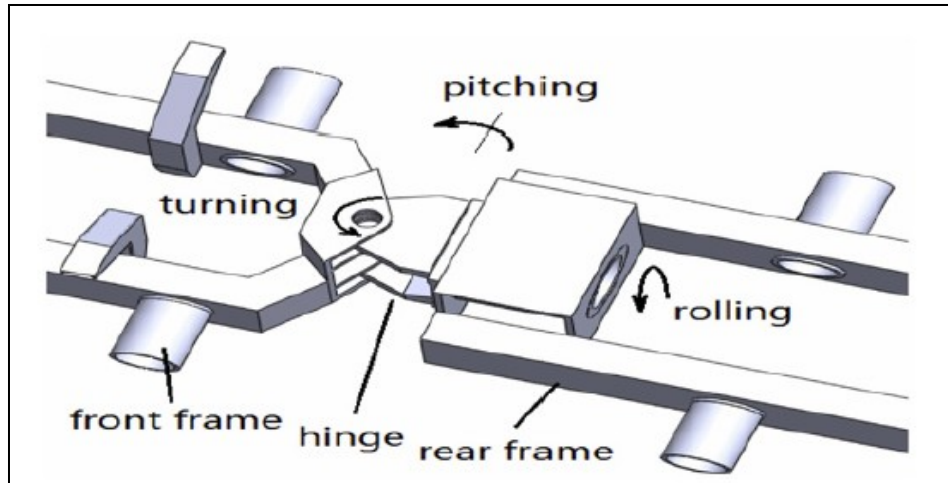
Basic Frame Arrangement of Typical ASV (After Huang, Shen, Zang, 2010)
